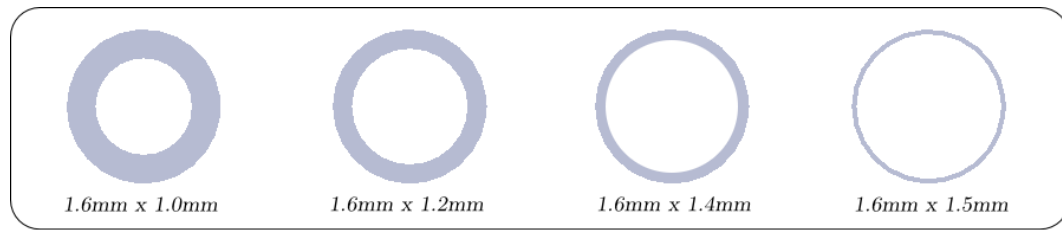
Outer and inner diameters of the different evaporation tube dimensions.
